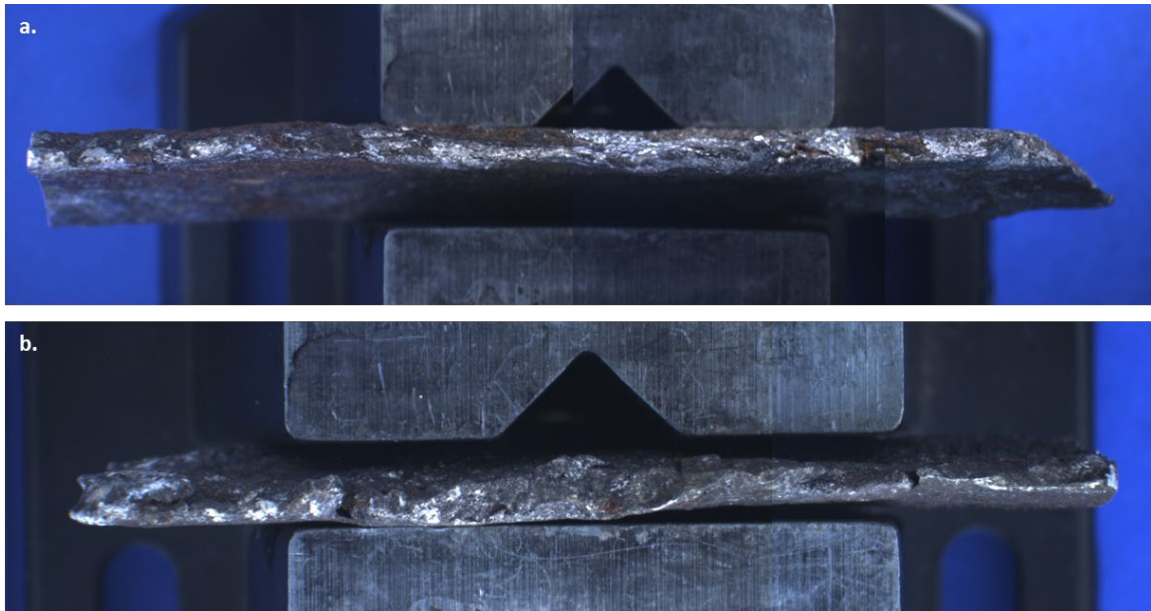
Stitched Stereoscope Images of (a) C001A-1A and (b) C001A-2A Axial Rupture Fracture Surfaces
